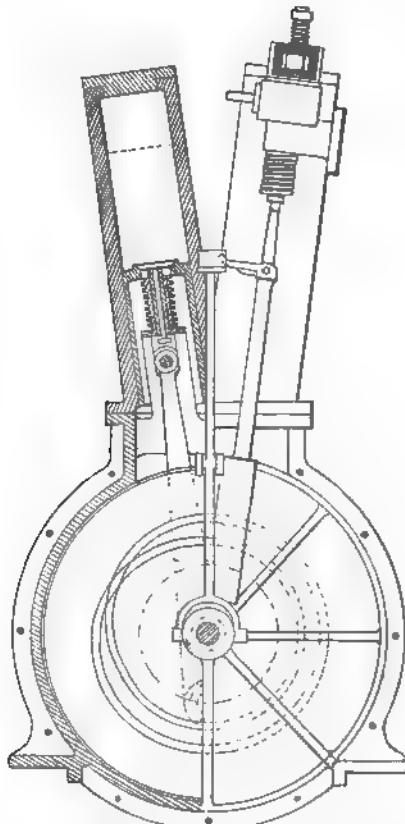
Part sectional view of the Daimler V-shaped Gasoline Engine, showing the air valve in the piston for admitting air at the suction stroke, and eccentric cam grooves on the fly-wheel disc. The method of opening the exhaust valve is also indicated. The pushrod of the exhaust valve carries a feather at its lower end, which travels on the eccentric cam grooves indicated on the face of the piston. Under impulse from the centrifugal governor, at high speed, the feather follows an approximately circular path, thus preventing the push rod from lifting and pushing the valve rod, to open the valve.
